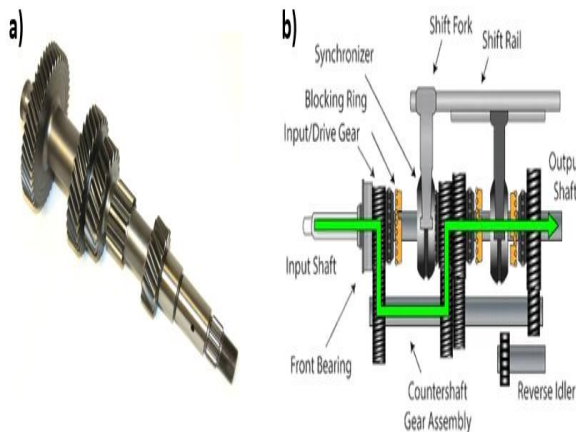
a) Cluster gear shaft b) Cluster gear shaft assembly.
